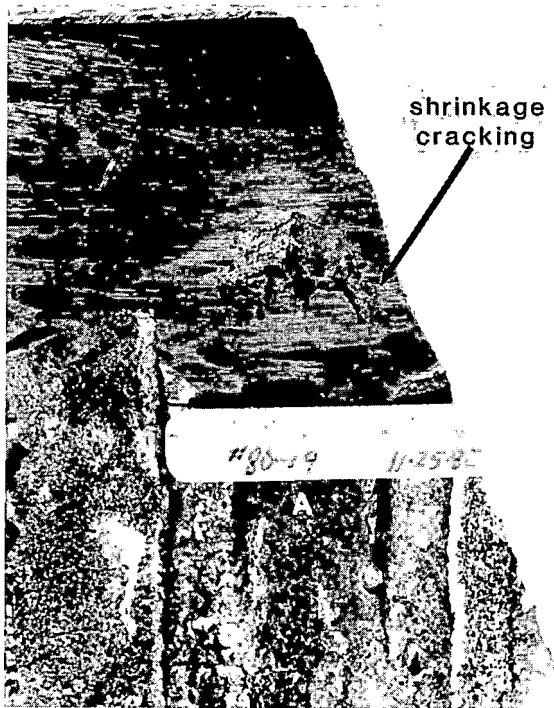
WELD FAILURE DUE TO COOLING SHRINKAGE.
